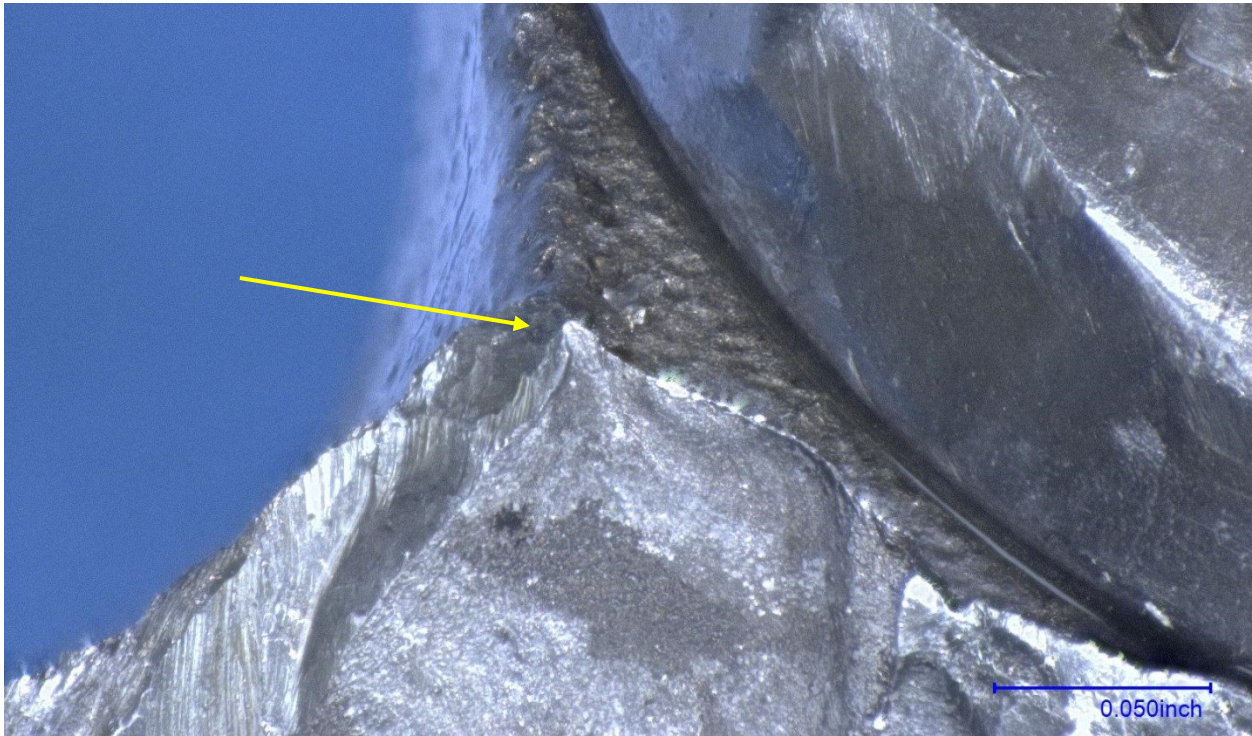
The crack initiation point (arrow) of the fatigue crack on the connecting rod yoke fragment.
